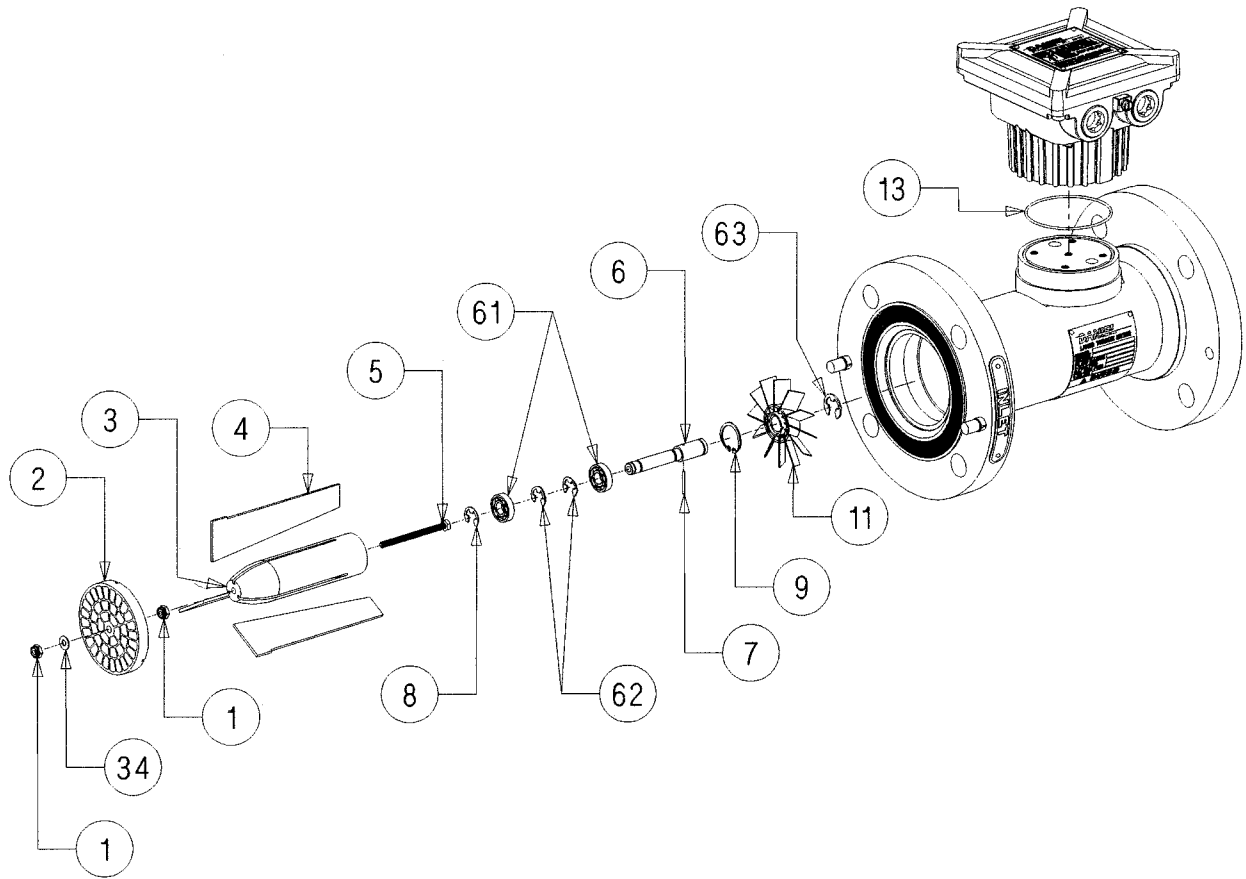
Meter Assembly (3" and 4") - Stainless Steel Bearing Internals
